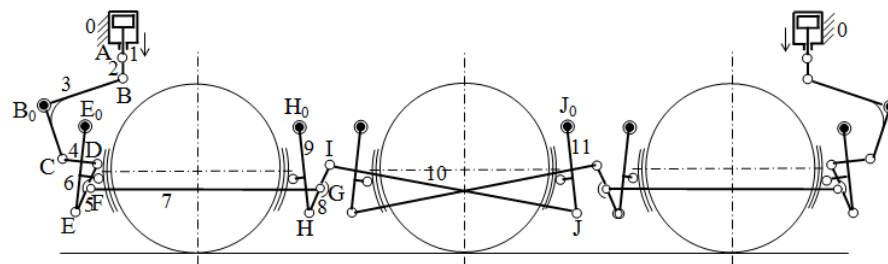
Kinematic scheme of the mechanism of the bogie brake blocks on 3 axles (locomotive)
